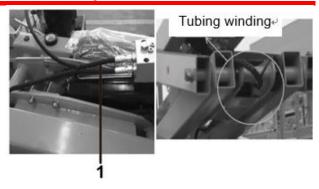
Routing and connecting oil pipes(SR4069D)
